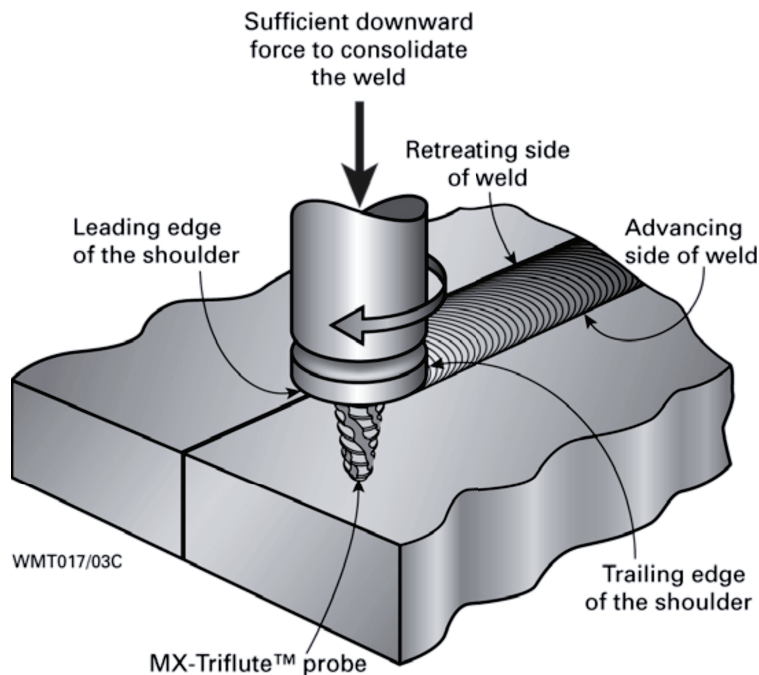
The principle of Friction Stir Welding with characteristic areas [12]
